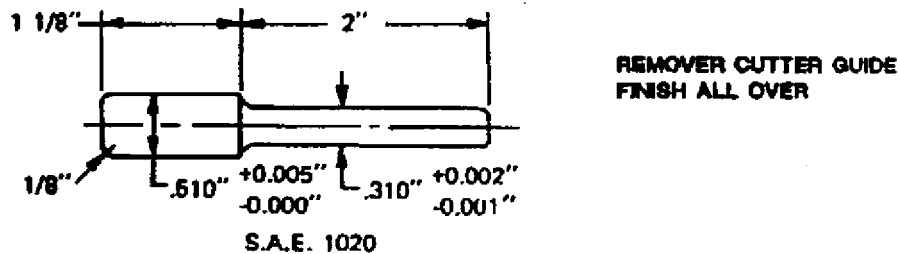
Cutter Guide for Tube Packing Remover
